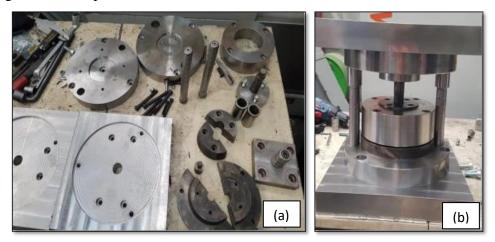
(a) Parts of the combined backward–forward extrusion process and (b) die assembly ((a) Birleşik geri-ileri ekstrüzyon işleminin parçaları ve (b) kalıp montajı)
